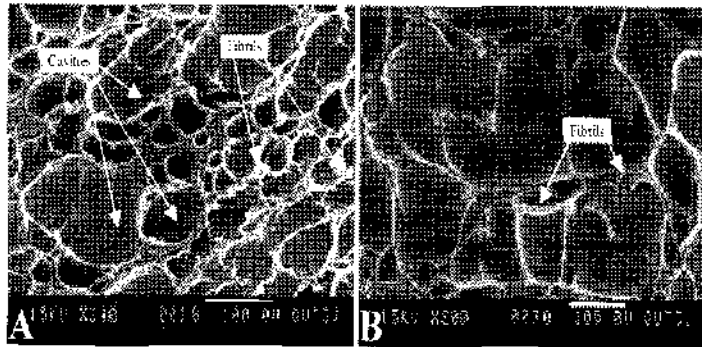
PC welding specimens with the highest tensile strength.
